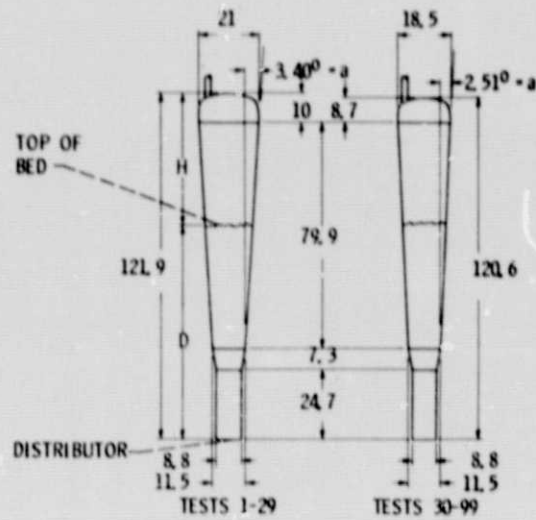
Two internal geometries of combustor (dimensions in inches except D and H; discharge solids removal auger and heat exchanger tubes omitted).
